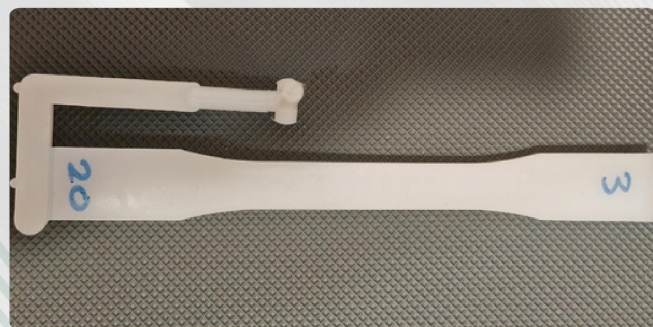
Injection moulded part produced at injection end positions of 20 mm.
